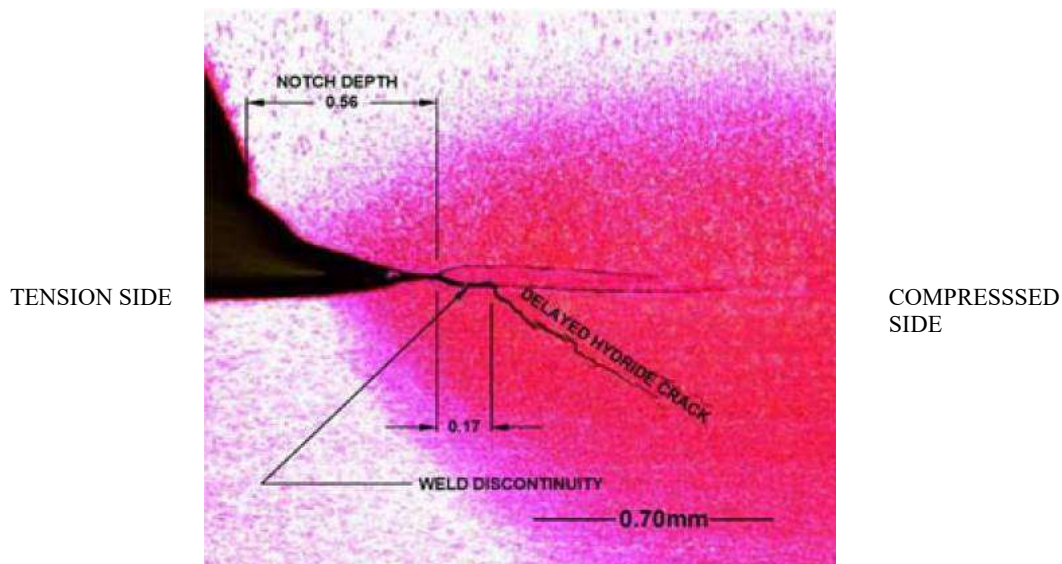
Metallographic section showing the weld notch, weld discontinuity and DHC crack (picture courtesy of OPG [4]).
